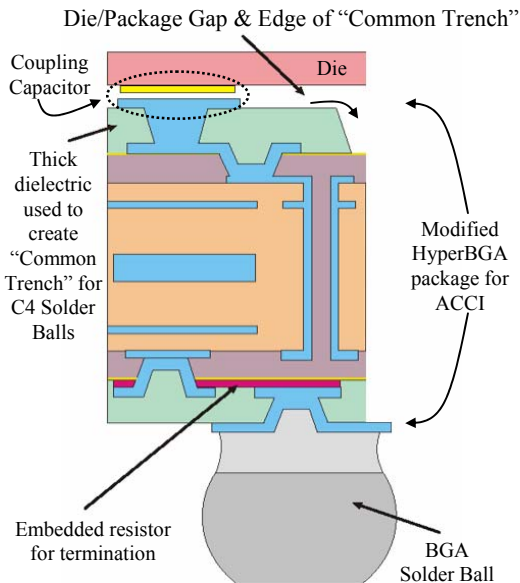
Cross sectional view of HyperBGA package modified for ACCI using buried bumps
